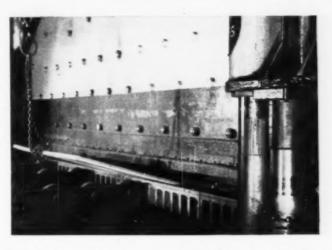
Start of forming operation. Edge is crimped in dies and then the plate is moved through the press to crimp the other edge
